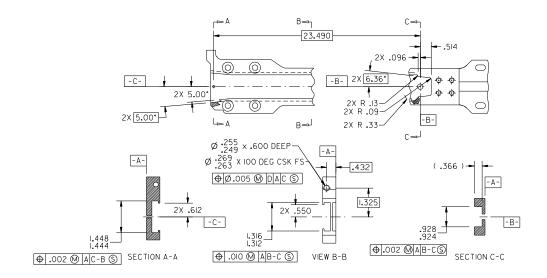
HRF Slide Guide/Wedge Socket Geometry
